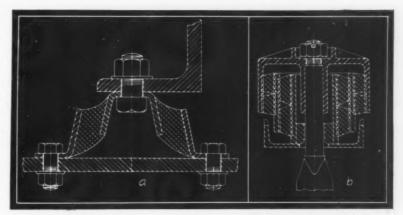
Practical shear rubber designs, section (a) being a common type. Section (b) gives an increase in deflection over that obtainable with a single cylindrical shear bushing
